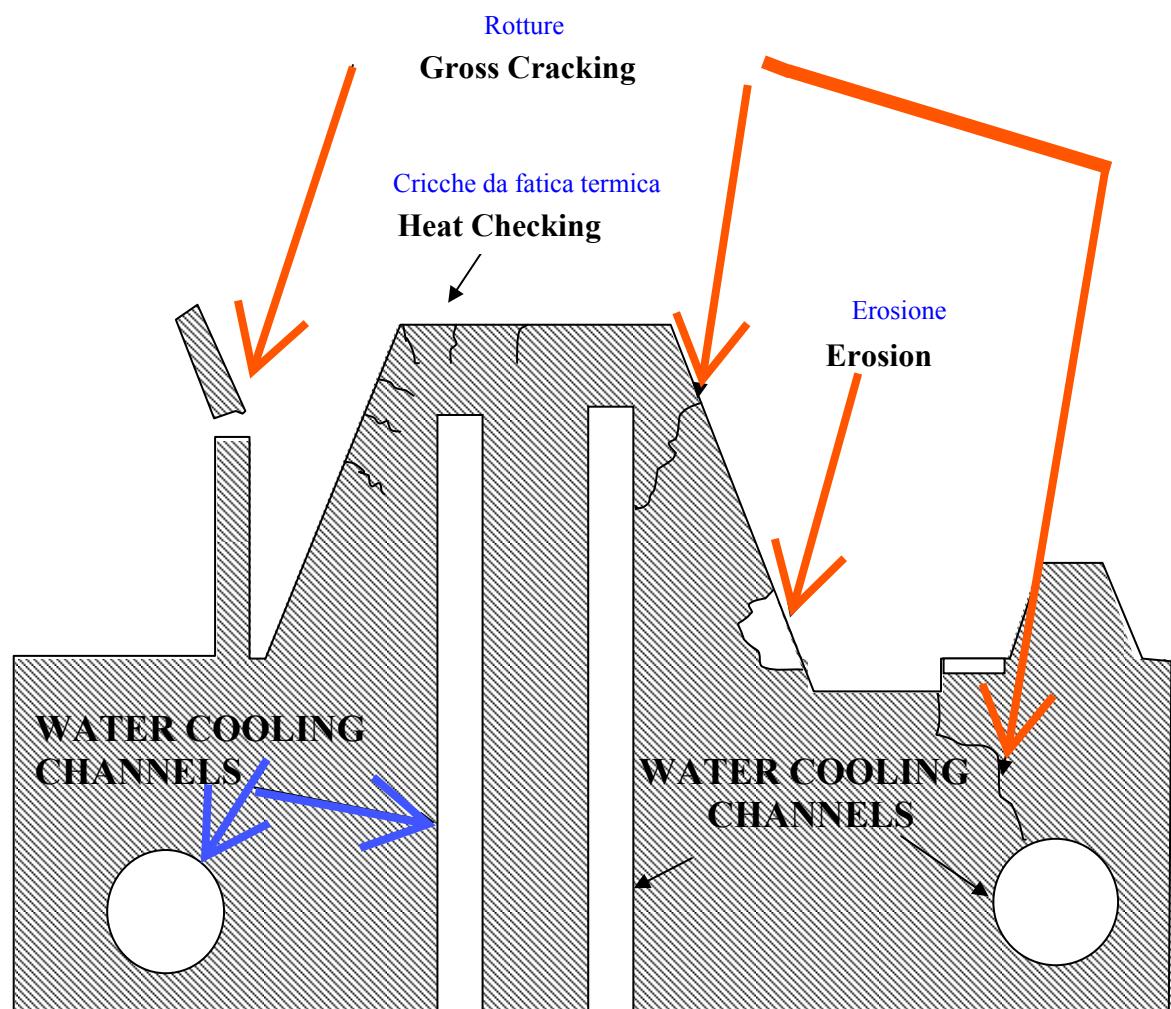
Schematic representation of typical die failure areas requiring welding
